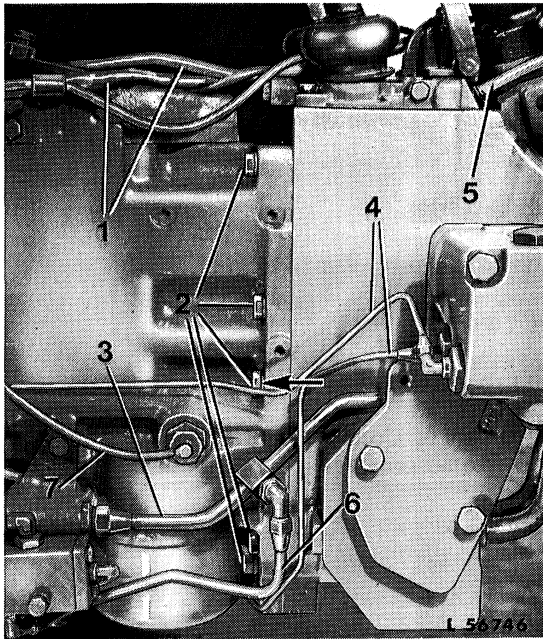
Separating between Clutch Housing and Transmission Case, R.H. Side (Earlier Model Shown)
